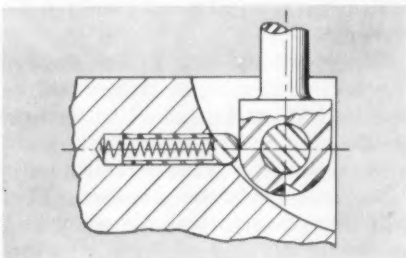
Drawing showing a type of positioner which must be provided in the slot of a swinging bolt which has no effective out-of-round shape on the head to serve as a stop.
